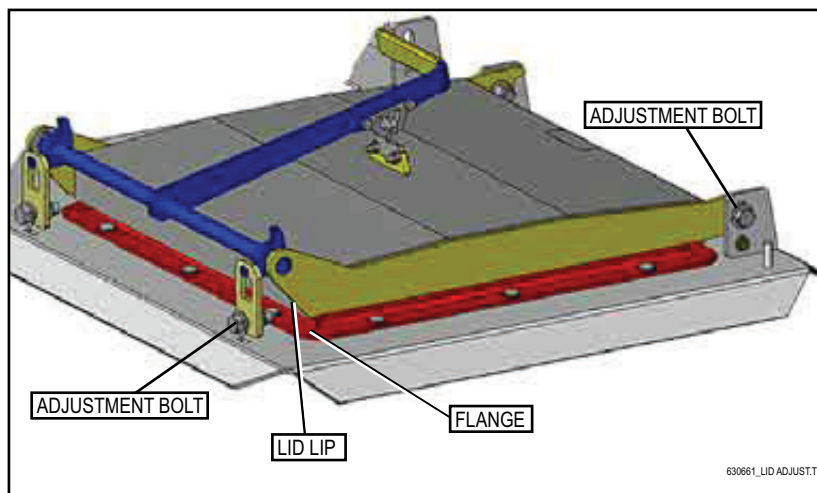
Tank Lid Assembly (Small Lid Shown)
